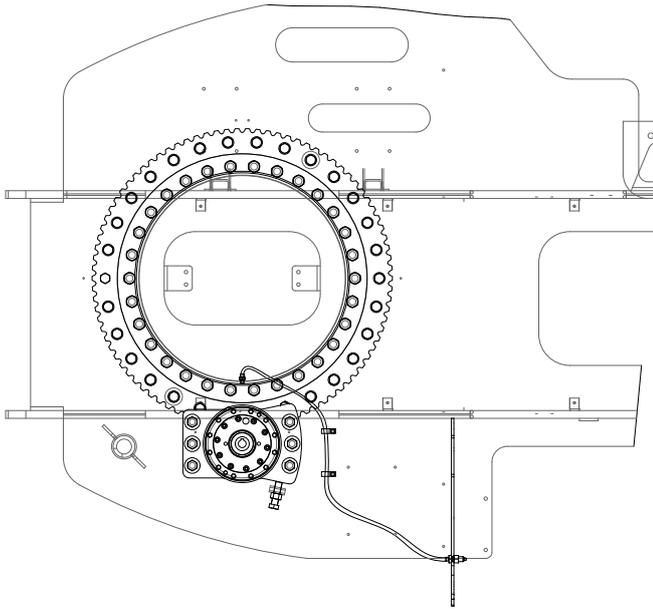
Diagram of Lubricating Slewing Bearing Remotely
